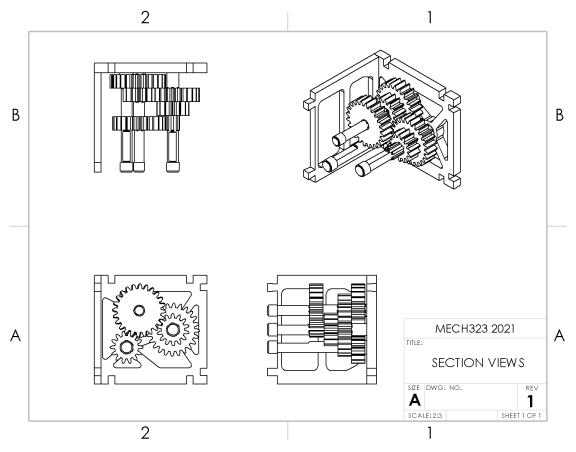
Section view of the assembly. Left side Housing and a Panel were removed to display all inner components and locations.
